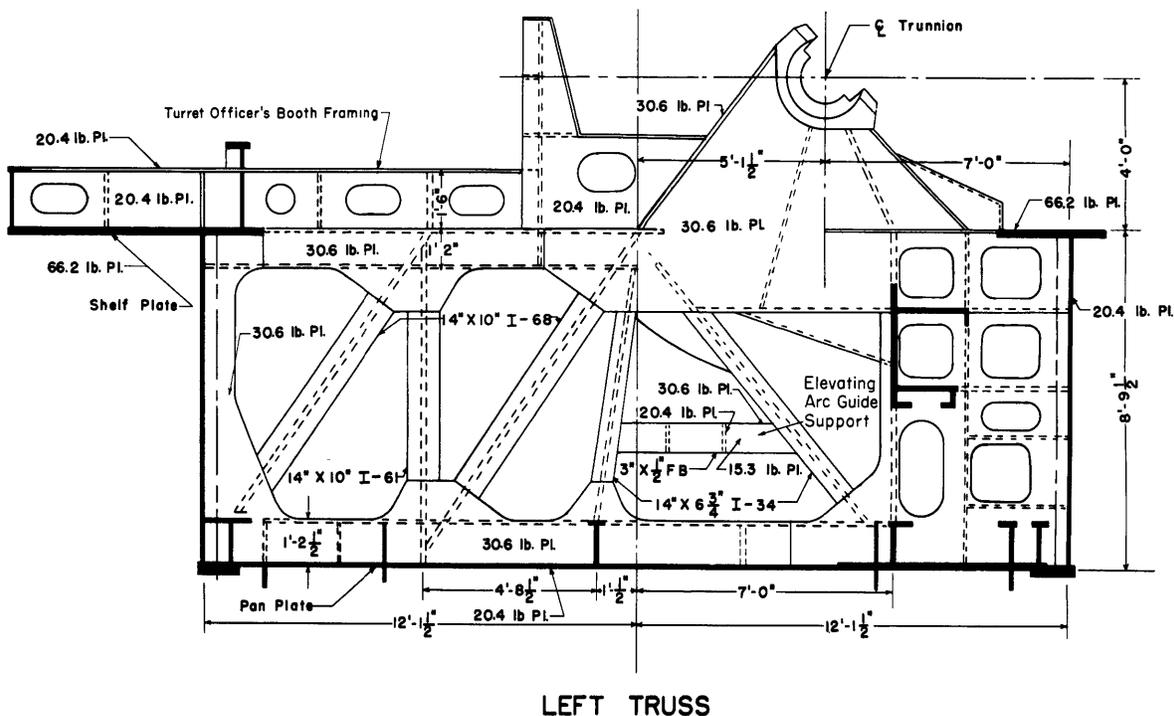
Full-Scale Dimensions of Truss and Adjoining Structure Which Supports Guns for 8-Inch Turret
